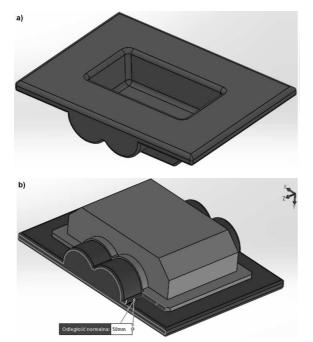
Complementary images to mold design process: a) optimized internal (non-working) side of mold, b) assembly of product model to mold model
